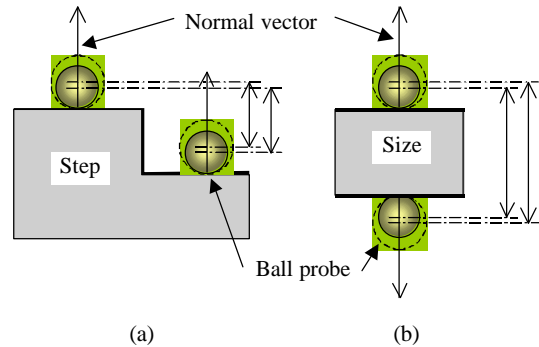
Effects of diameter errors of ball probe on (a) step dimension and (b) size dimension
